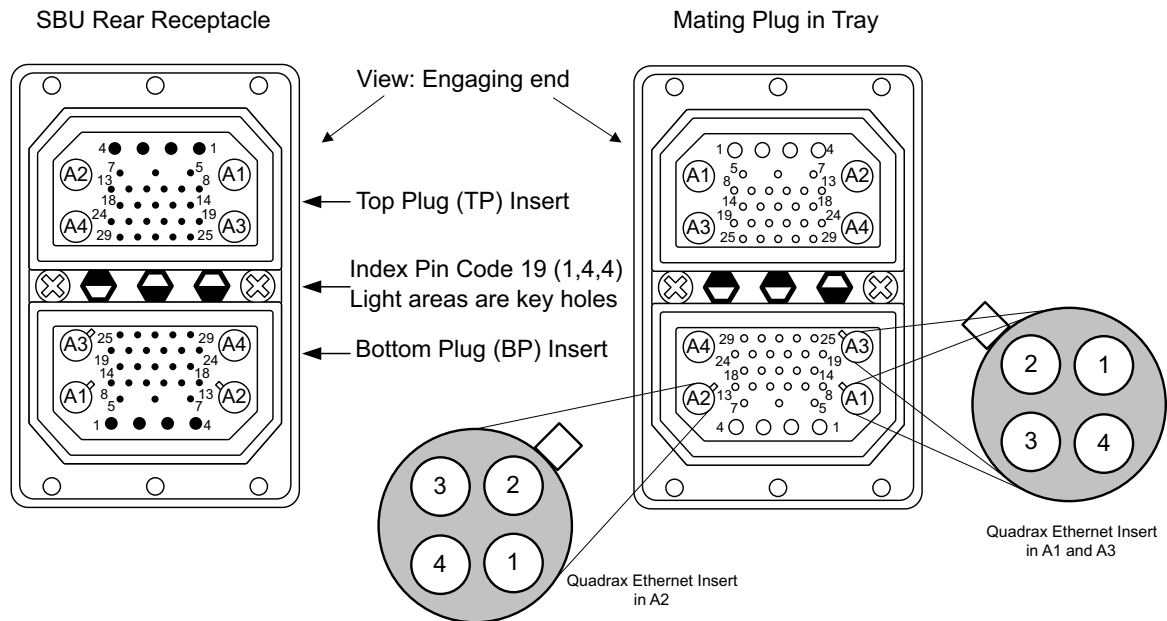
SBU rear receptacle, engaging end (Index code: 19)
